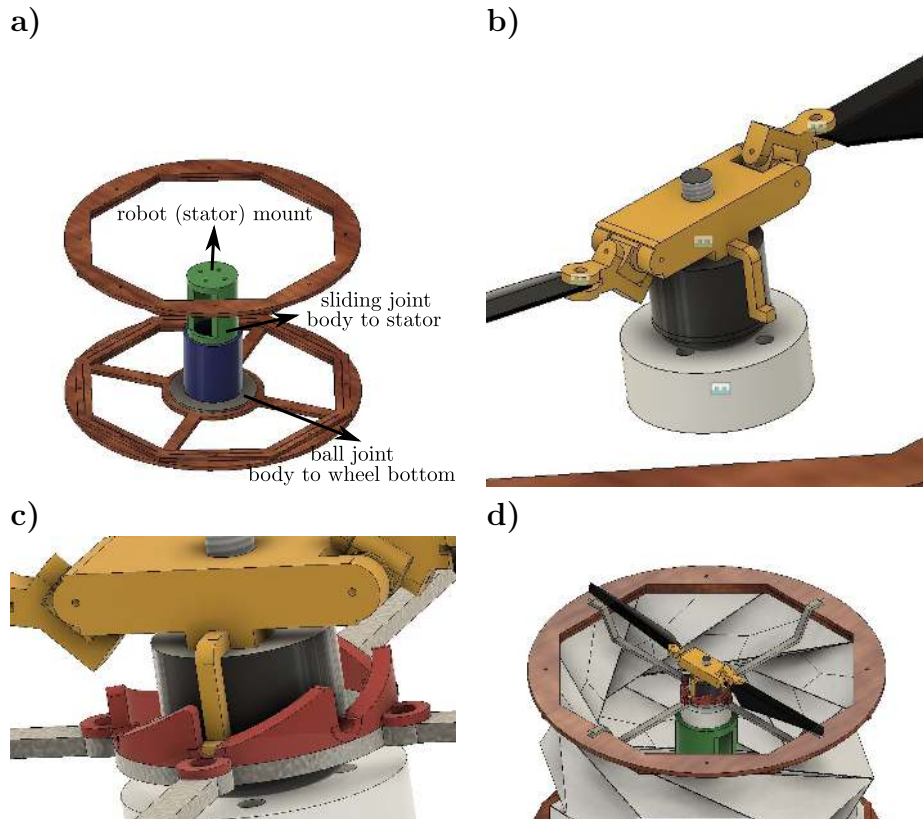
CAD details for the latch system. a) Joint schematics. b) Rotor latch hook. c) Rotor latch hook connected to the wheel's latch socket. d) CAD of the latch connection, showing all components.
